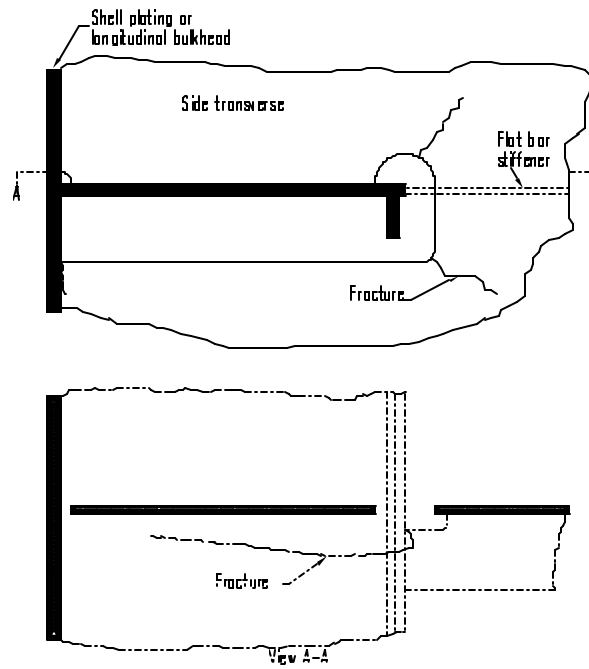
Side shell fractures at cut-outs for longitudinal stiffener connections.
